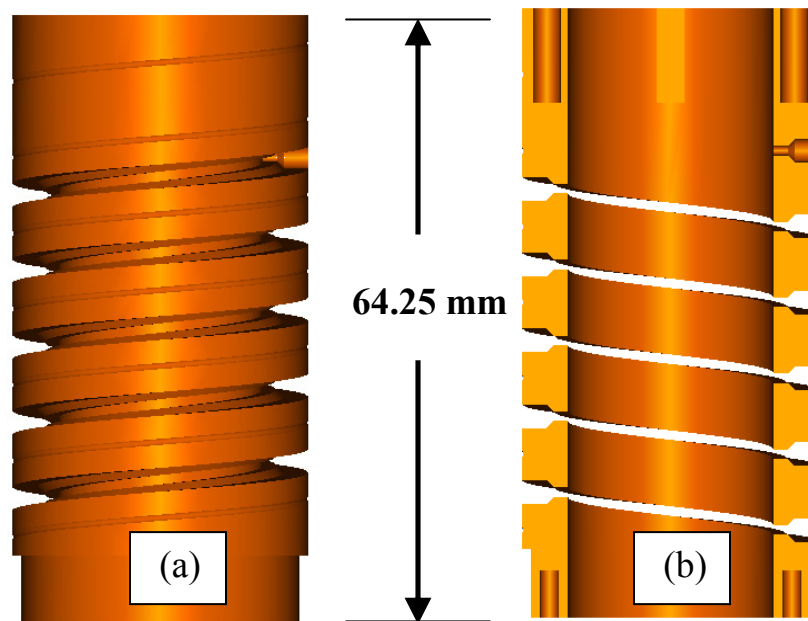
(a) 3D Model of the spring (b) Section view of the spring
